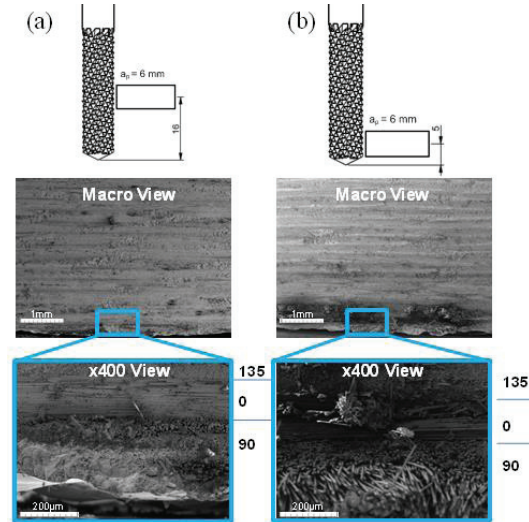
SEM images of the difference in machined CFRP surface quality due to variation in axial tool engagement location for 6mm axial depth of cut for (a) 16 mm and (b) 5 mm workpiece centre offset from tool tip.
